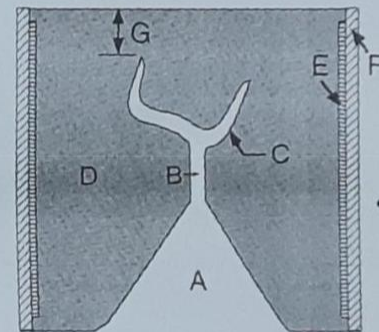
Diagrammatic representation of a dental casting mold: A, crucible former; B, sprue; C, cavity formed by wax pattern after burnout; D, investment; E, liner; F, casting ring; G, recommended maximum investment thickness of approximately 6 mm between the end of the mold cavity and the end of the invested ring to provide pathways for sufficient gas escape during casting.
